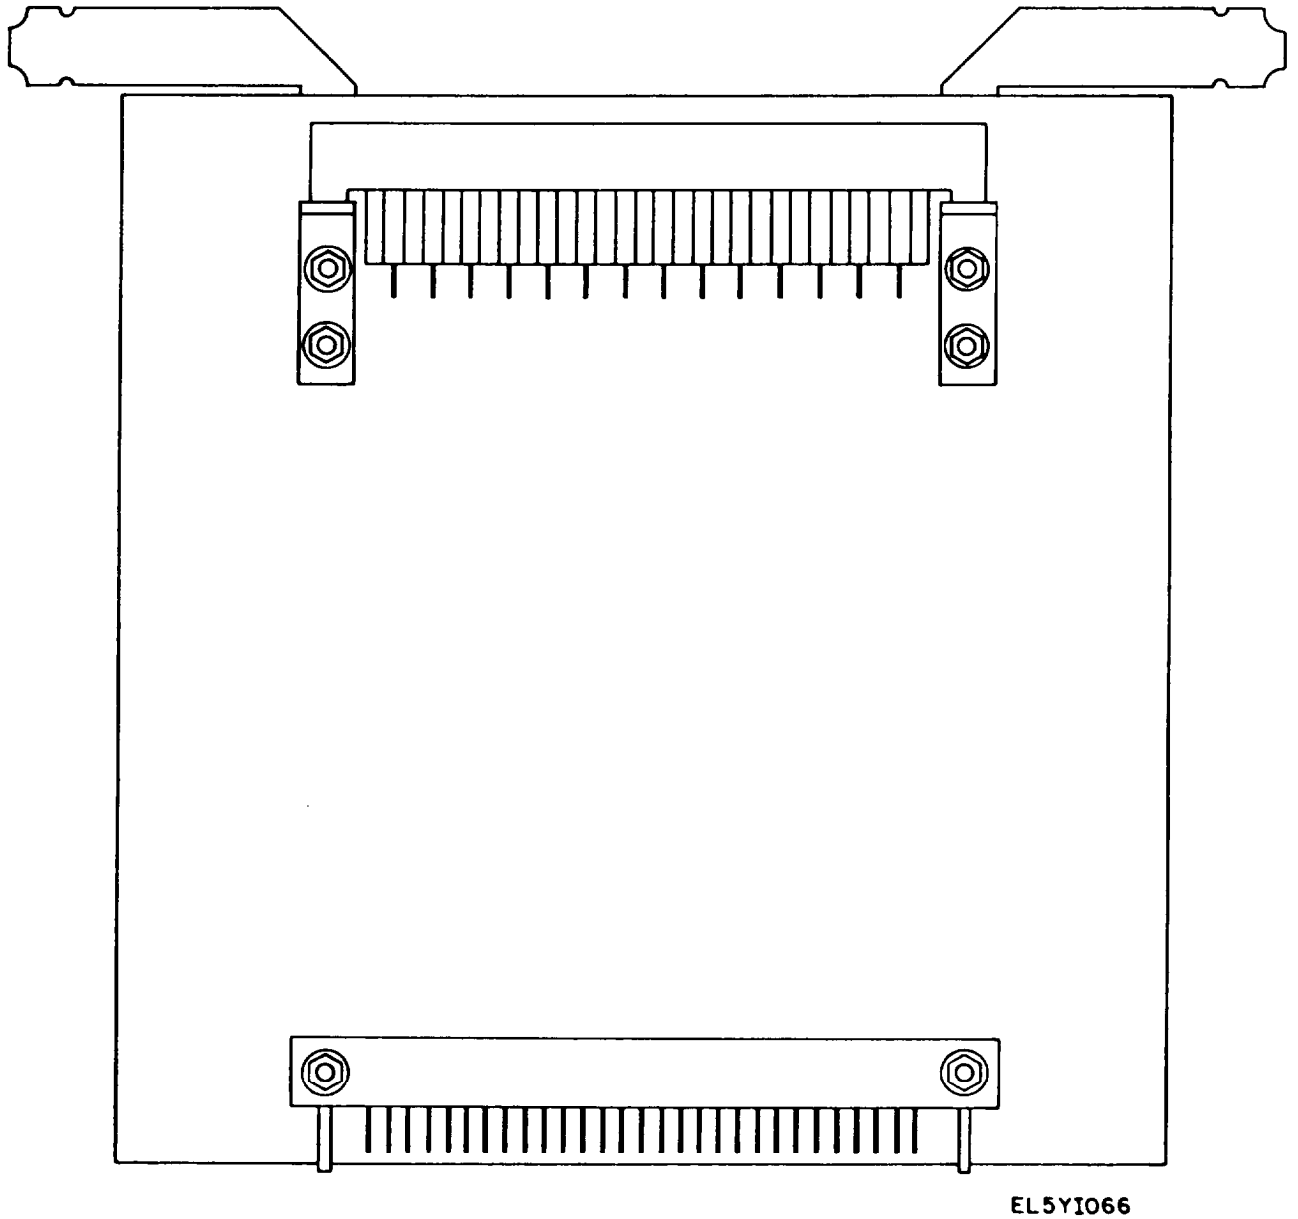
EXTENDER BOARD ASSEMBLY A14
